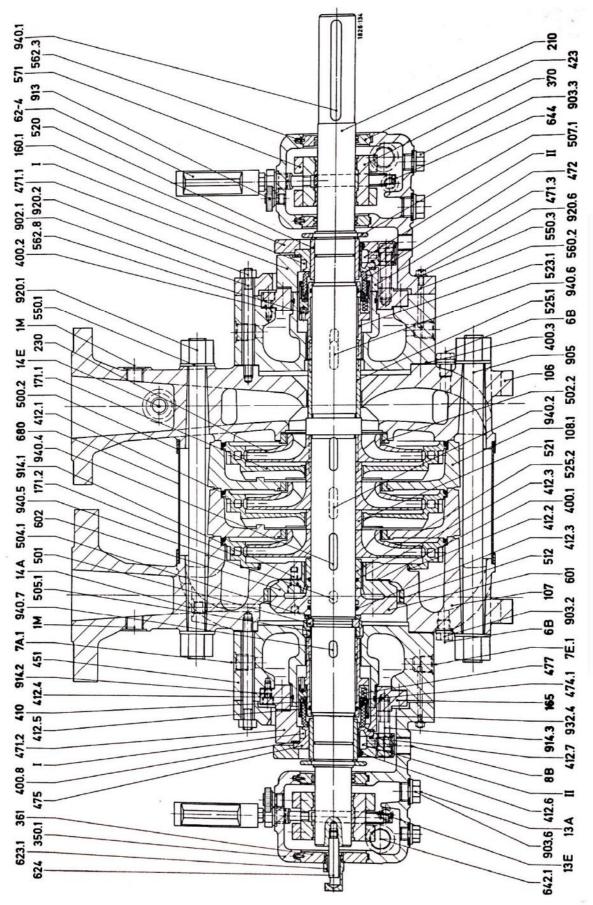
Standard execution sizes 65 up to 150 with plain bearings and mechanical seals (For specific details for sizes 125, see fig.50)
